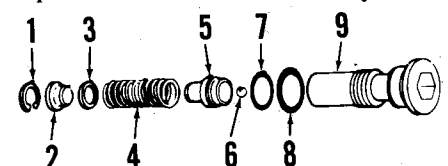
Exploded view of hydraulic pressure relief valve used on TW-10, TW-20 and TW-30 models.
